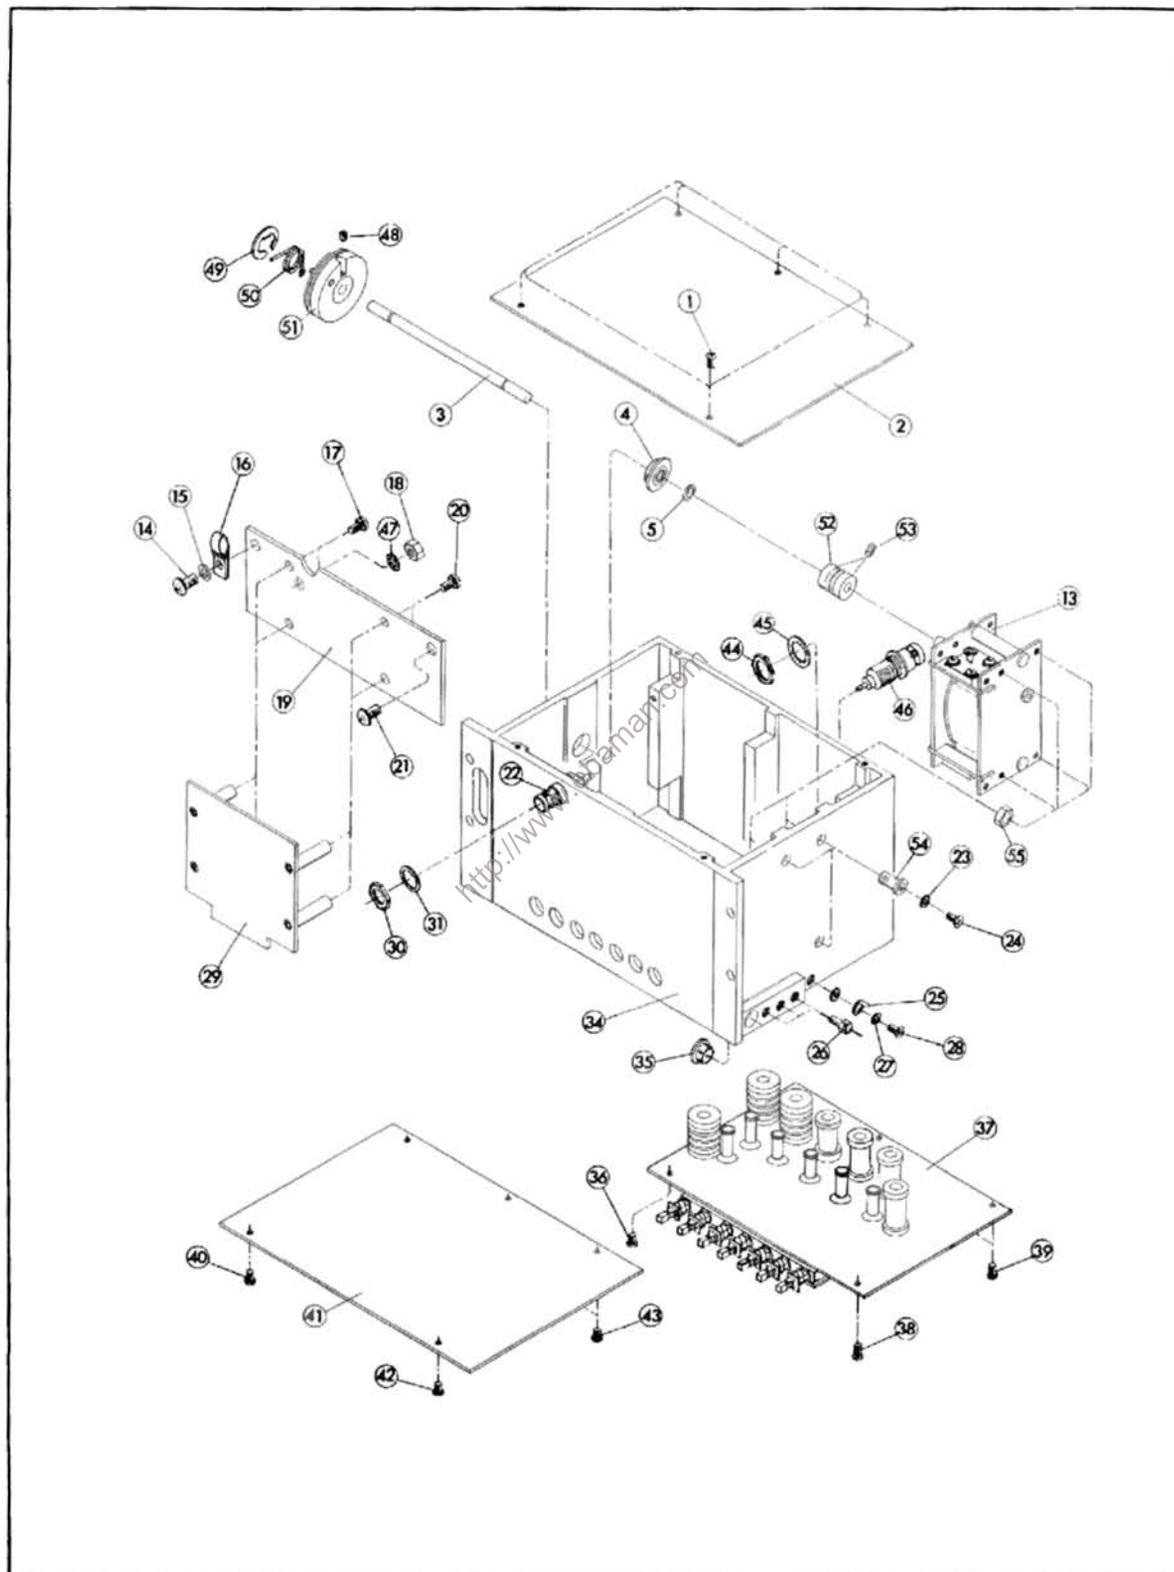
Exploded View of Oscillator Ass'y (sheet 1 of 2)
